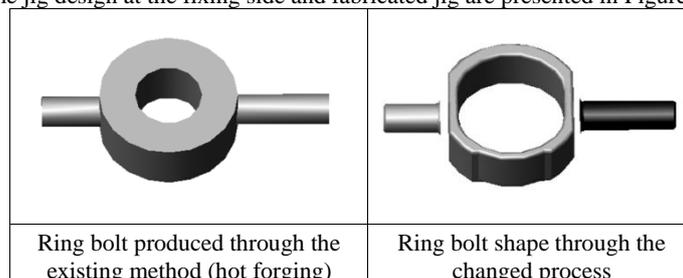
Shapes of the ring bolt before (left) and after design changes (right)
